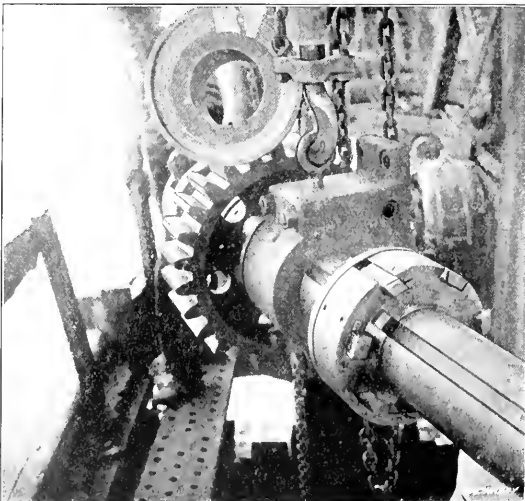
Boring-bar and Cutter-head equipped with Seven Tools
